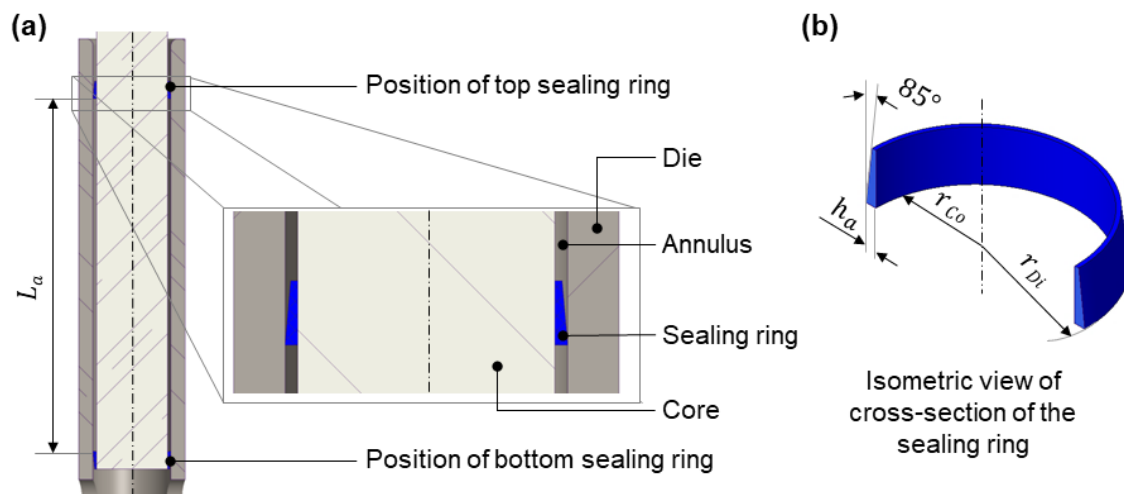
Cross-section of – (a) the die-core arrangement with sealing rings and (b) isometric view of the sealing ring.
